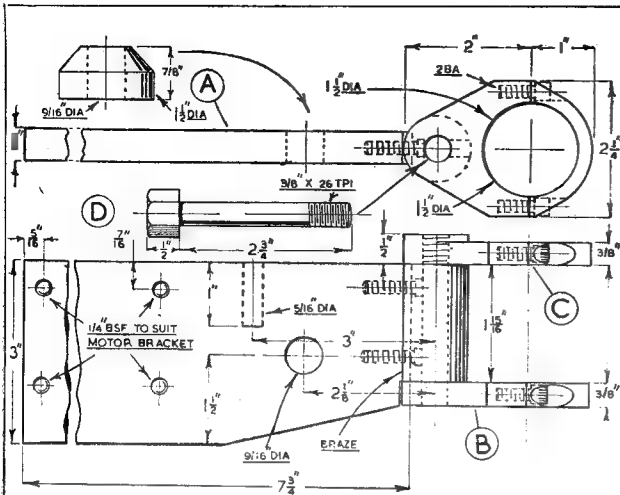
A the baseplate; B and C the two grinder housings; D the cross-bolt
